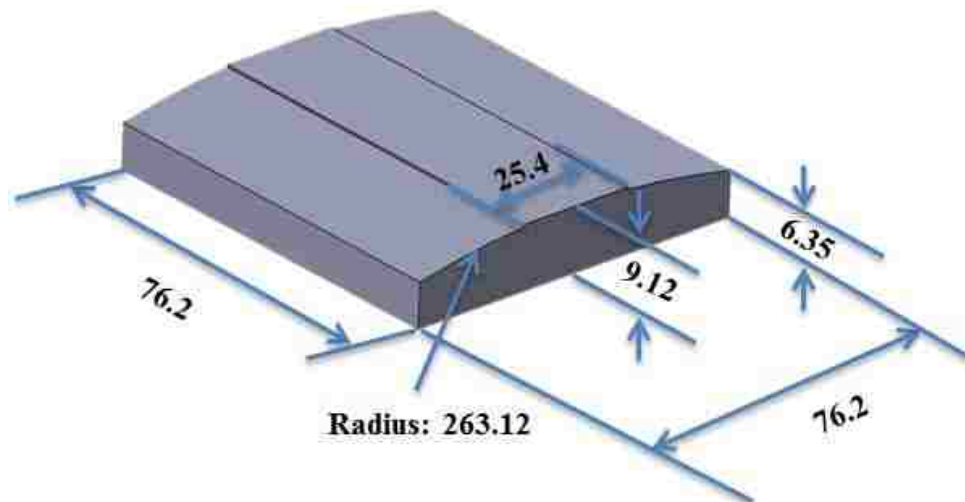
Illustration of partial-pressure validation testing tool dimensions (mm)
